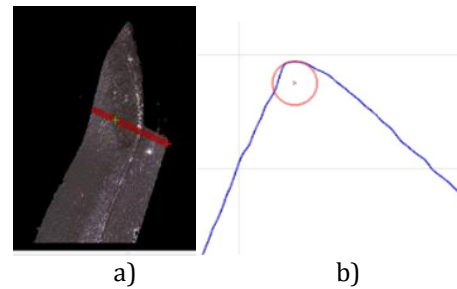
Measurement of tool wear in: a) 3D, and b) 2D.
